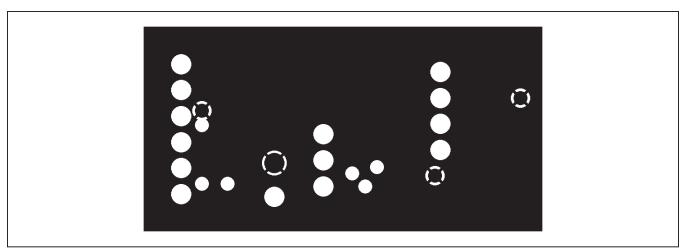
MAX5216PMB1 Peripheral Module PCB Layout—Inner Layer 2 (Power)
